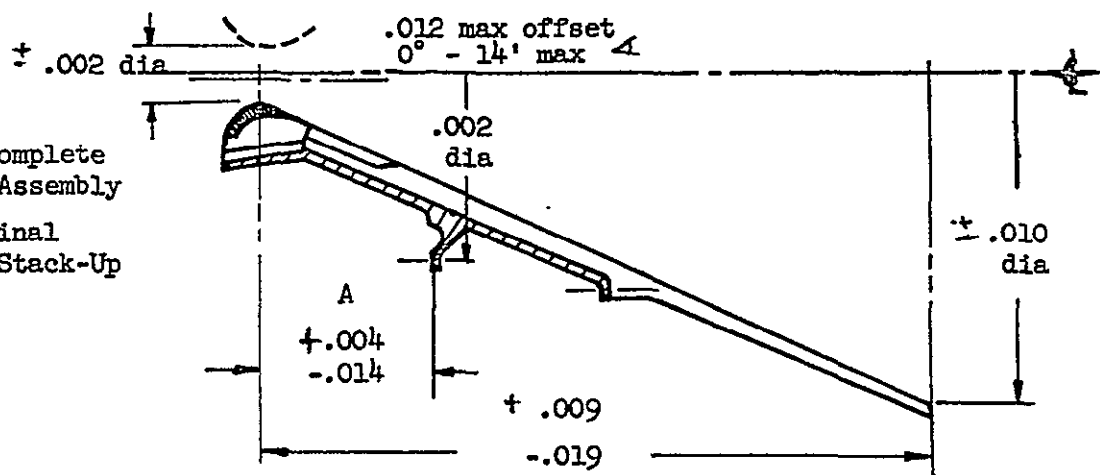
Dimensional Tolerance Stack-up for Baseline Nozzle
